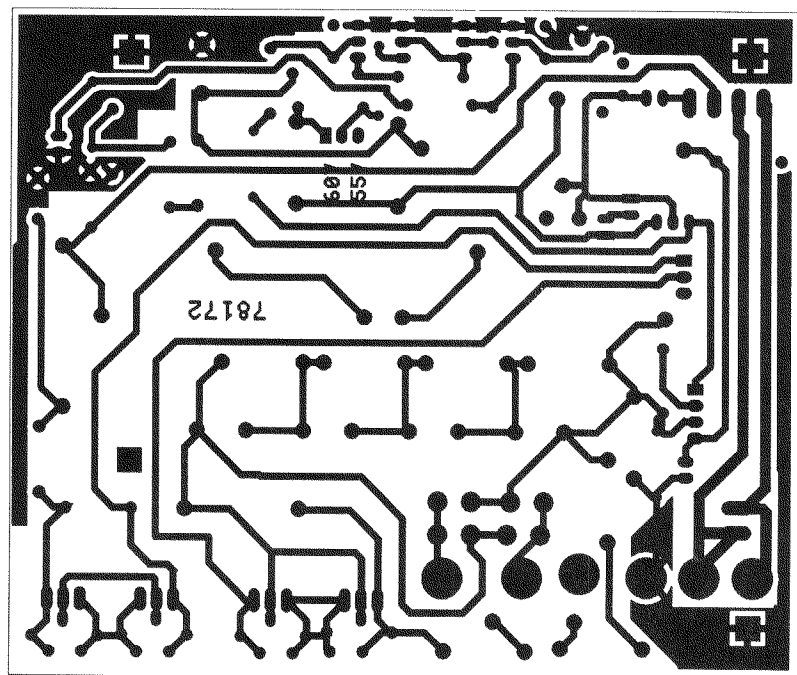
SCREEN SUPPLY BOARD CIRCUIT LAYOUT AS VIEWED THROUGH BOARD
